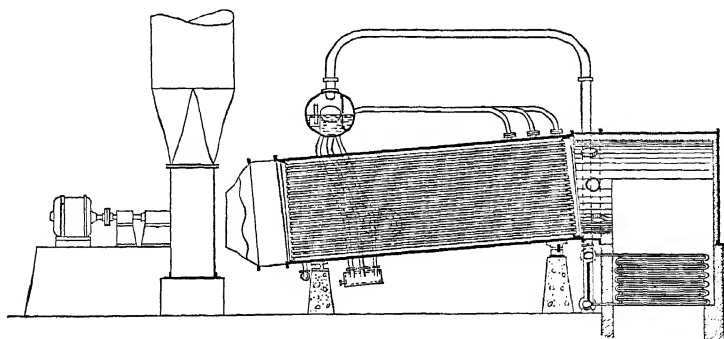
Horizontal Fire-tube Waste Heat Boiler
